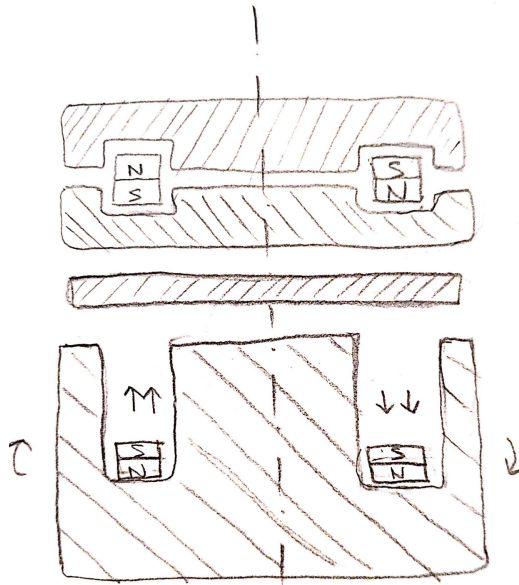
Exploded view of non-fixed magnets accelerating when rotating.
